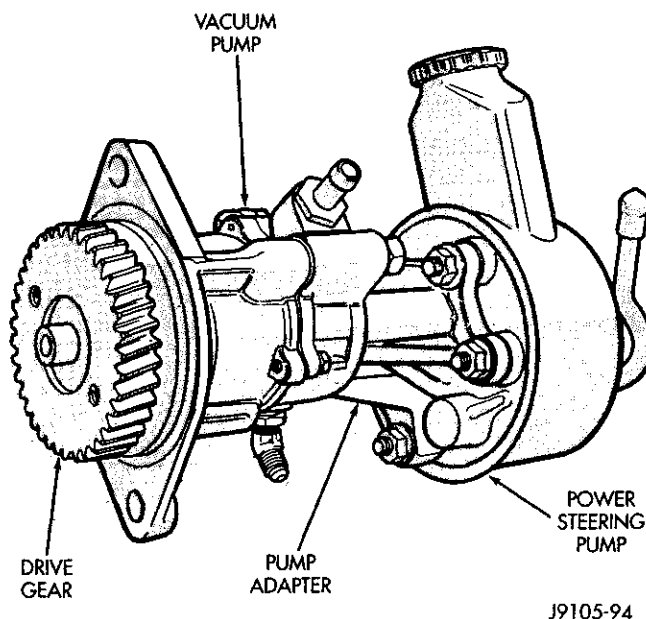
Diesel Vacuum & Power Steering Pump Assembly
